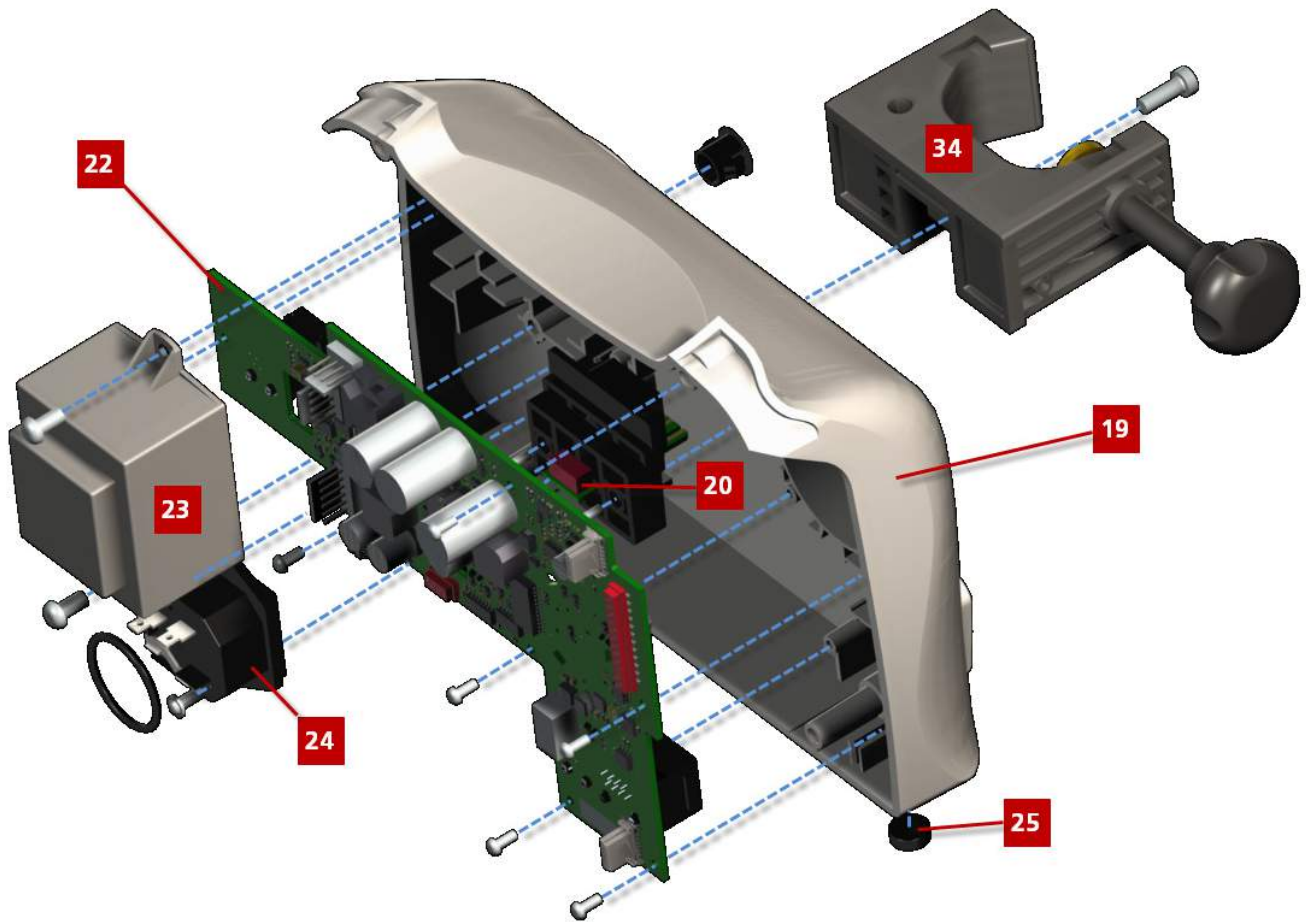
Exploded View ARGUS 71x V - Casing backside inside
